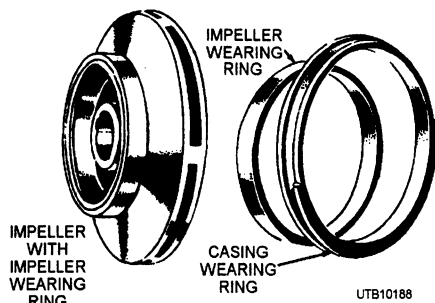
Impeller, impeller wearing ring, and casing wearing ring for a centrifugal pump.
